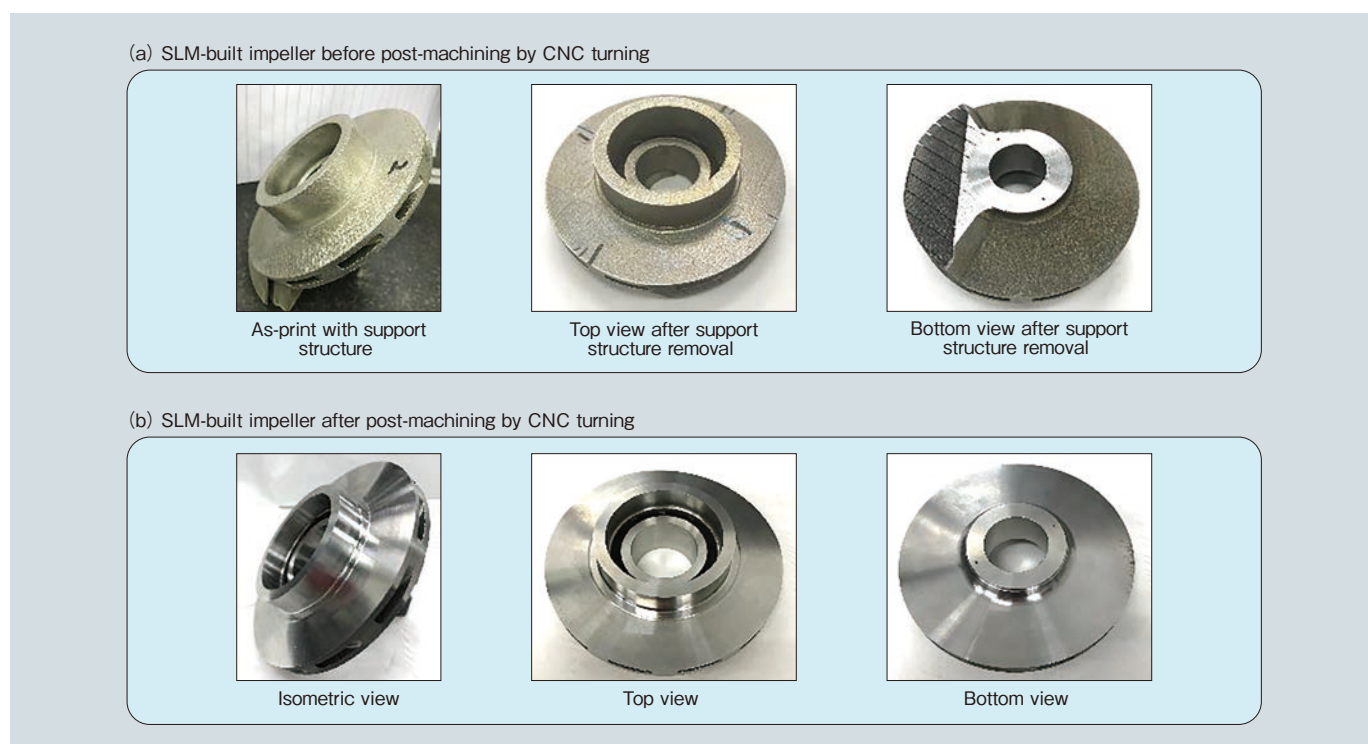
SLM-built impeller (a) before and (b) after post-machining by CNC turning
